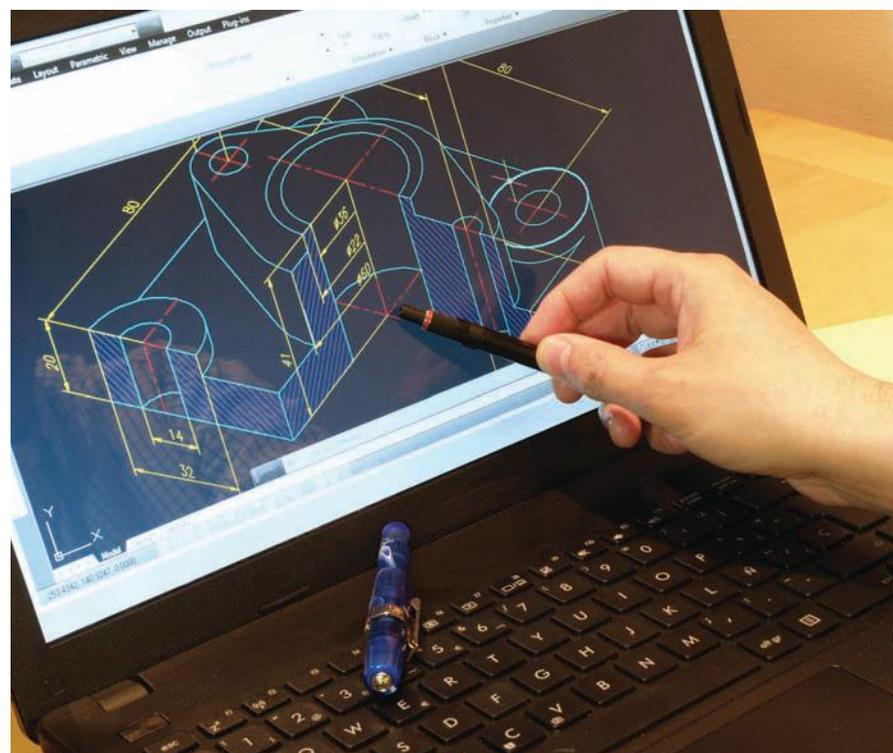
A CAD version of a component in isometric view, showing some technical information
